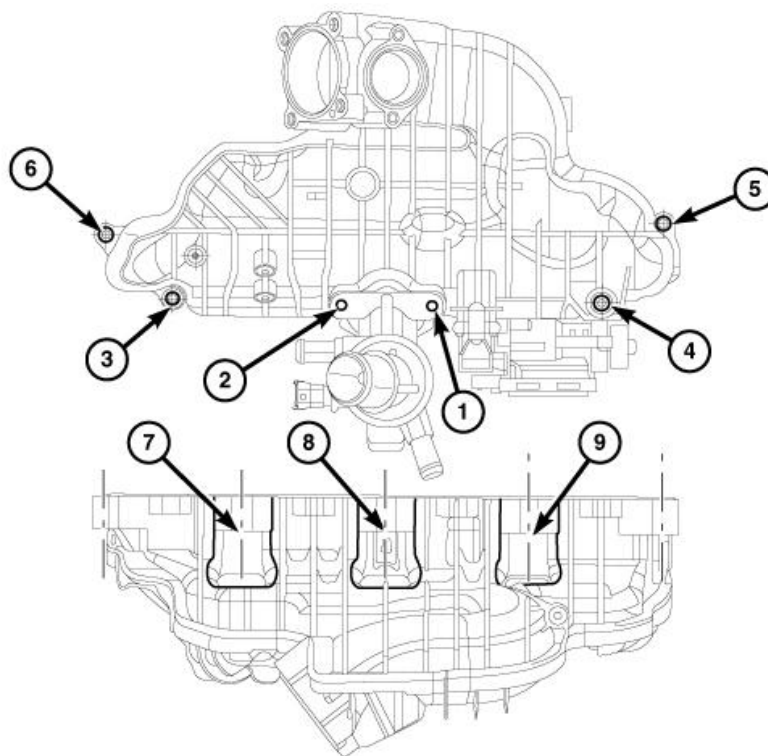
Intake Manifold Retaining Nuts Tightening Sequence
